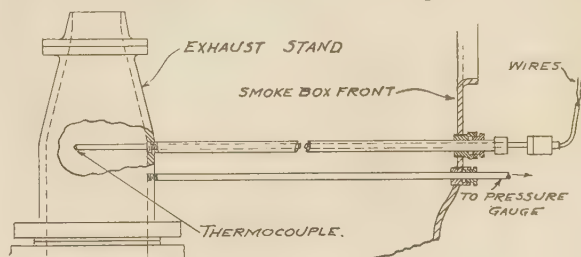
EXHAUST-STAND THERMOCOUPLE AND PRESSURE-GAGE CONNECTION
